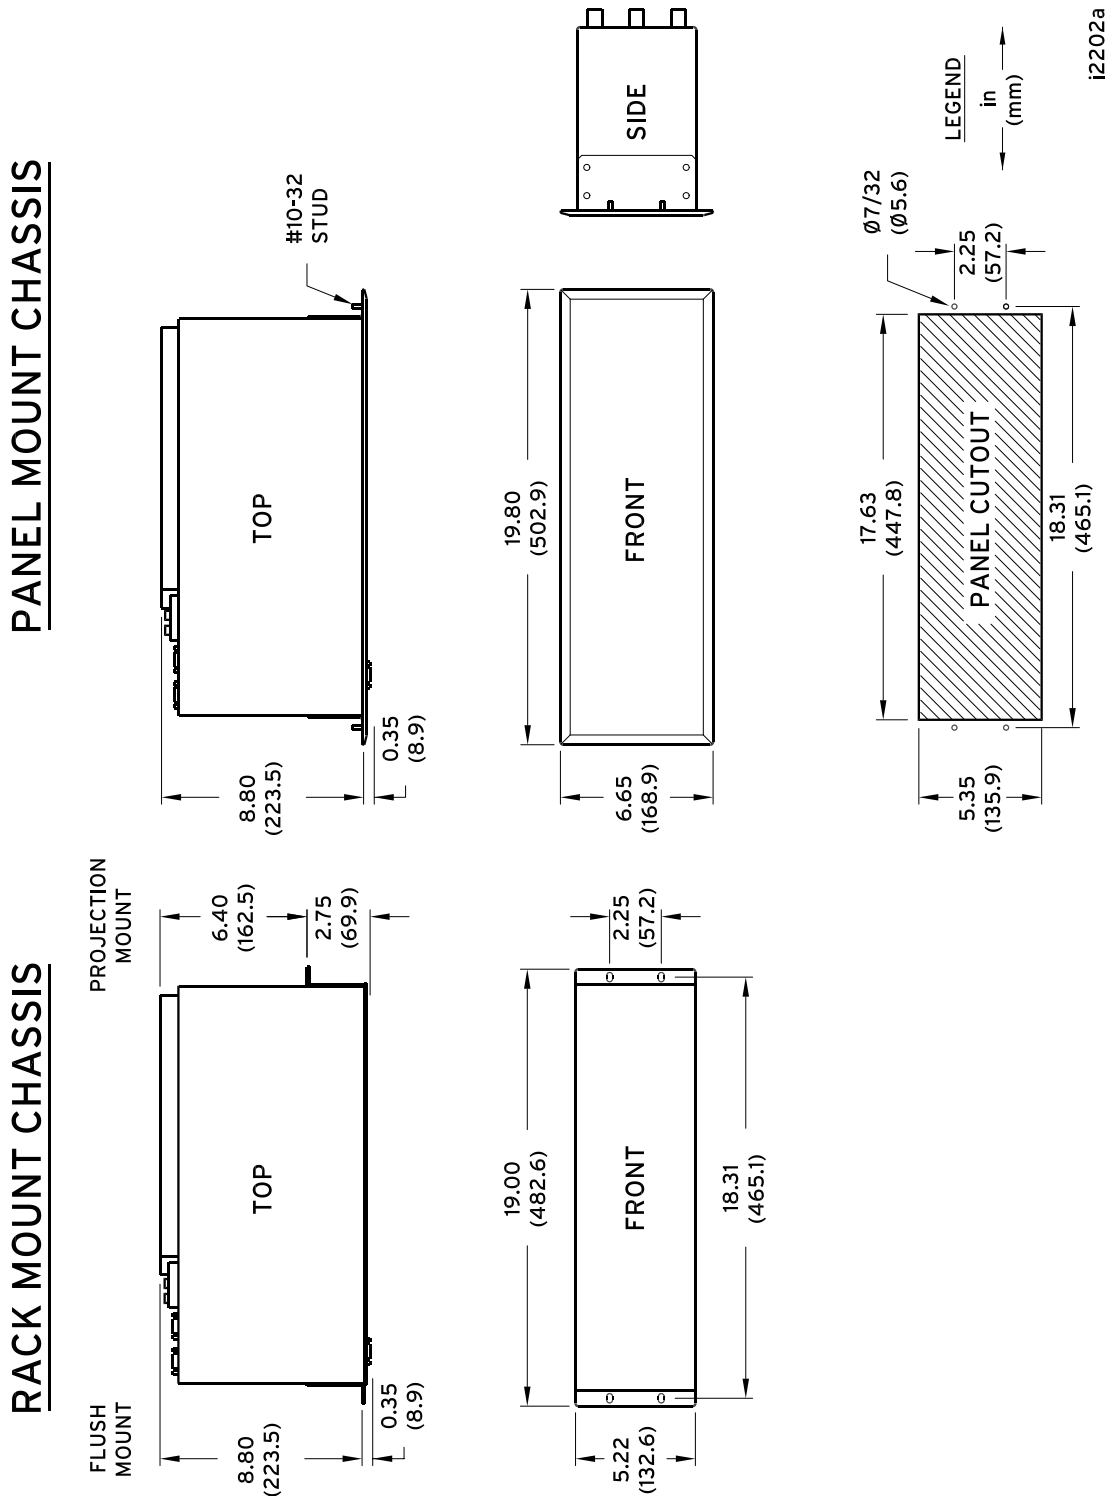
SEL-311L Relay Dimensions and Panel-Mount Cutout
